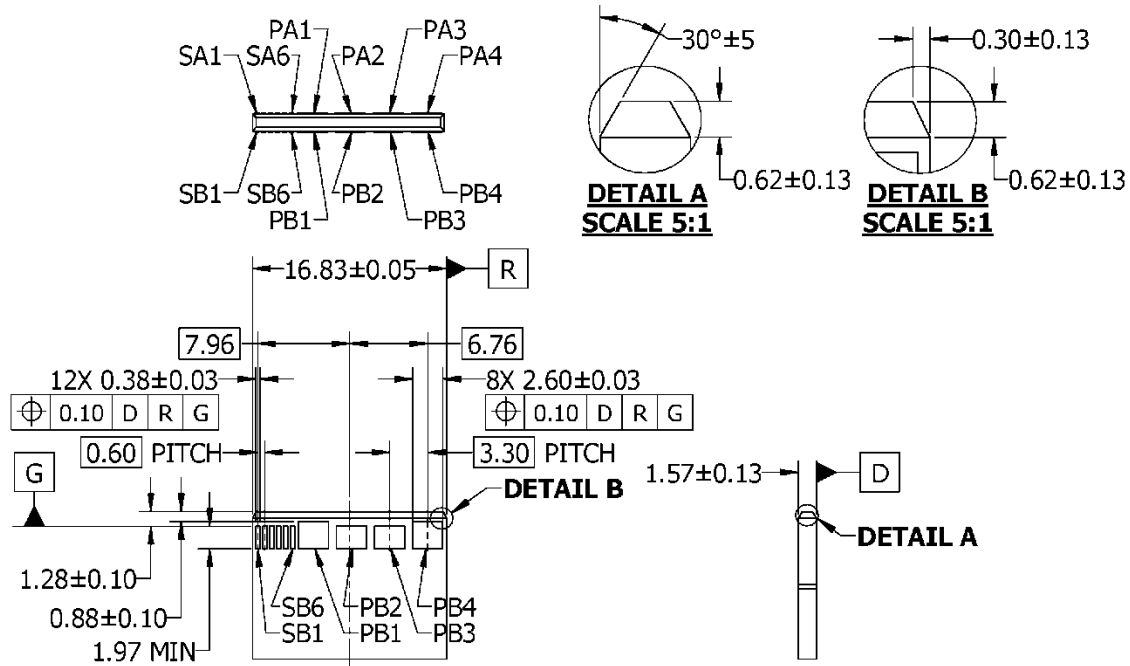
Plug Paddle Card for 34A High Power Plugs
